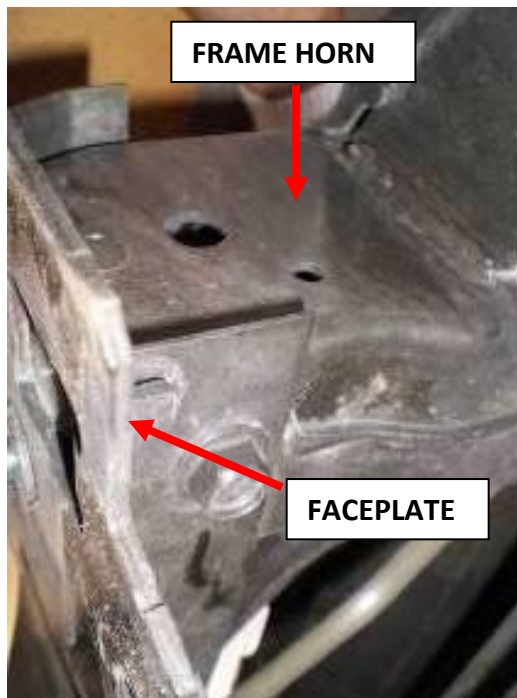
Remove faceplate before cutting welds on crossmember.
